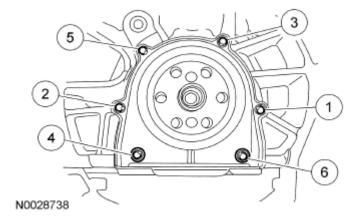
Identifying Crankshaft Rear Oil Seal With Retainer Plate Bolts Tightening Sequence
